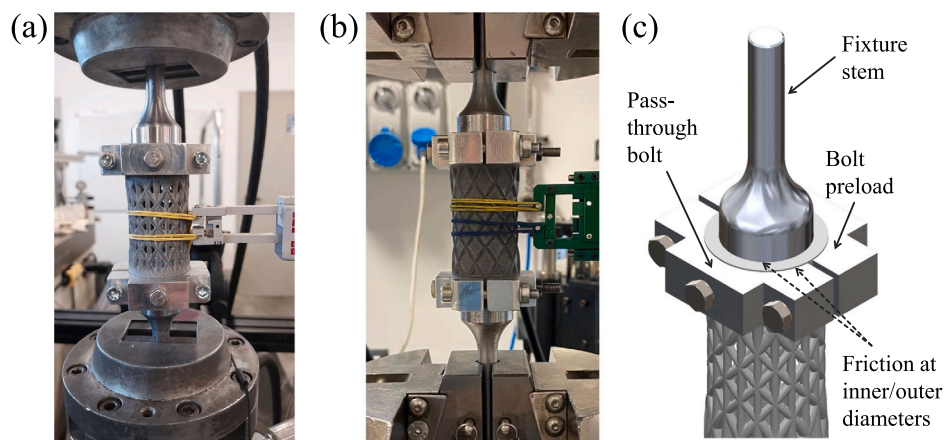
(a) Tensile test on T specimen, (b) tensile test on S specimen and (c) design of the clamping system to perform tensile tests.
